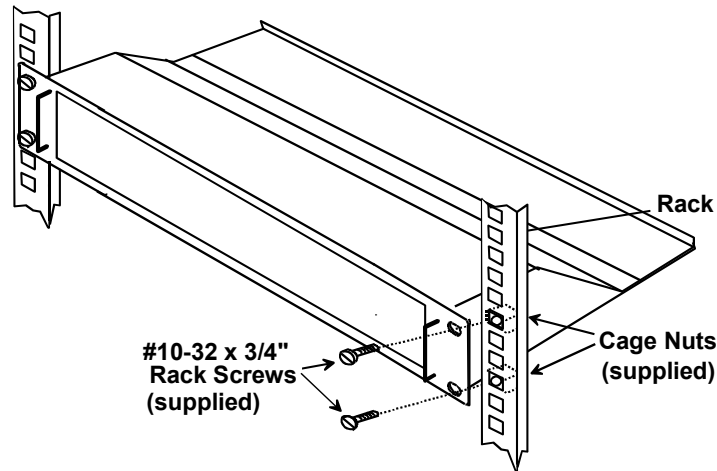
Mount ST-C5RCK-12 Extender Module Tray in a rack
